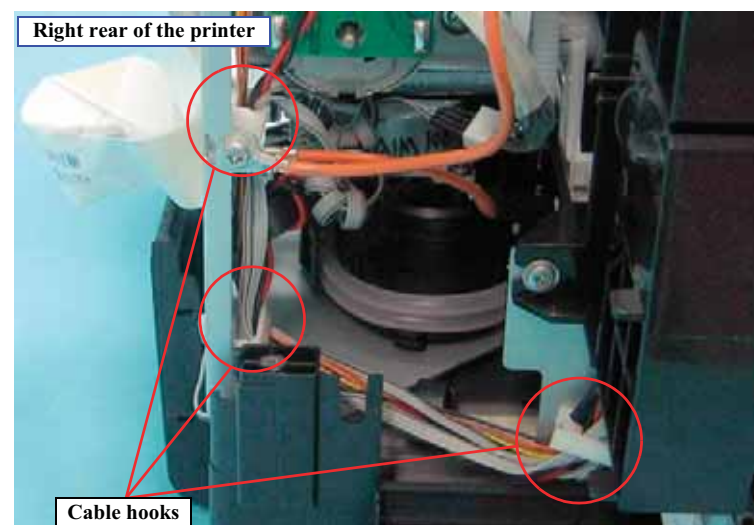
Releasing the MOTOR ASSY., APG cables (1)
